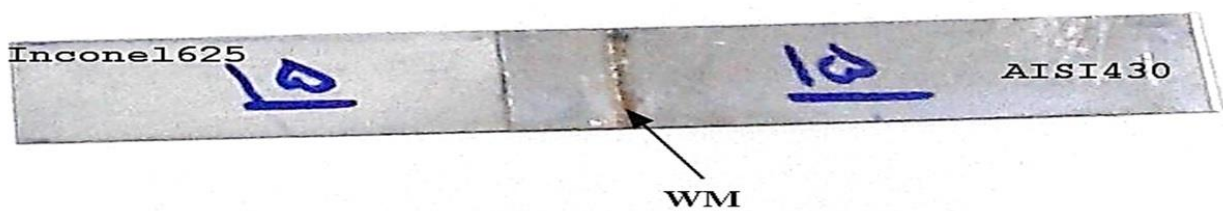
A typical tensile test specimen of dissimilar laser weld joint.
